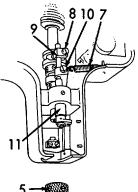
Looper and Finger, Removal. GO TO NEXT PAGE
